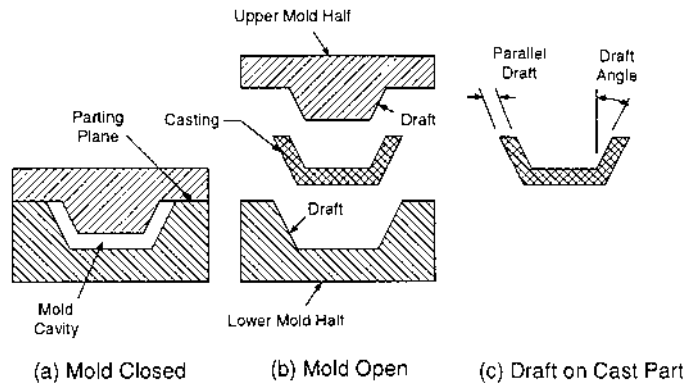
The mold is divided into two halves so that the final casting, core, or pattern can be withdrawn. (a) The mating junction between the mold halves defines the parting plane; (b) Draft provides ejection clearance upon mold half separation; (c) With draft, walls and other features cannot be exactly perpendicular to the parting plane.
